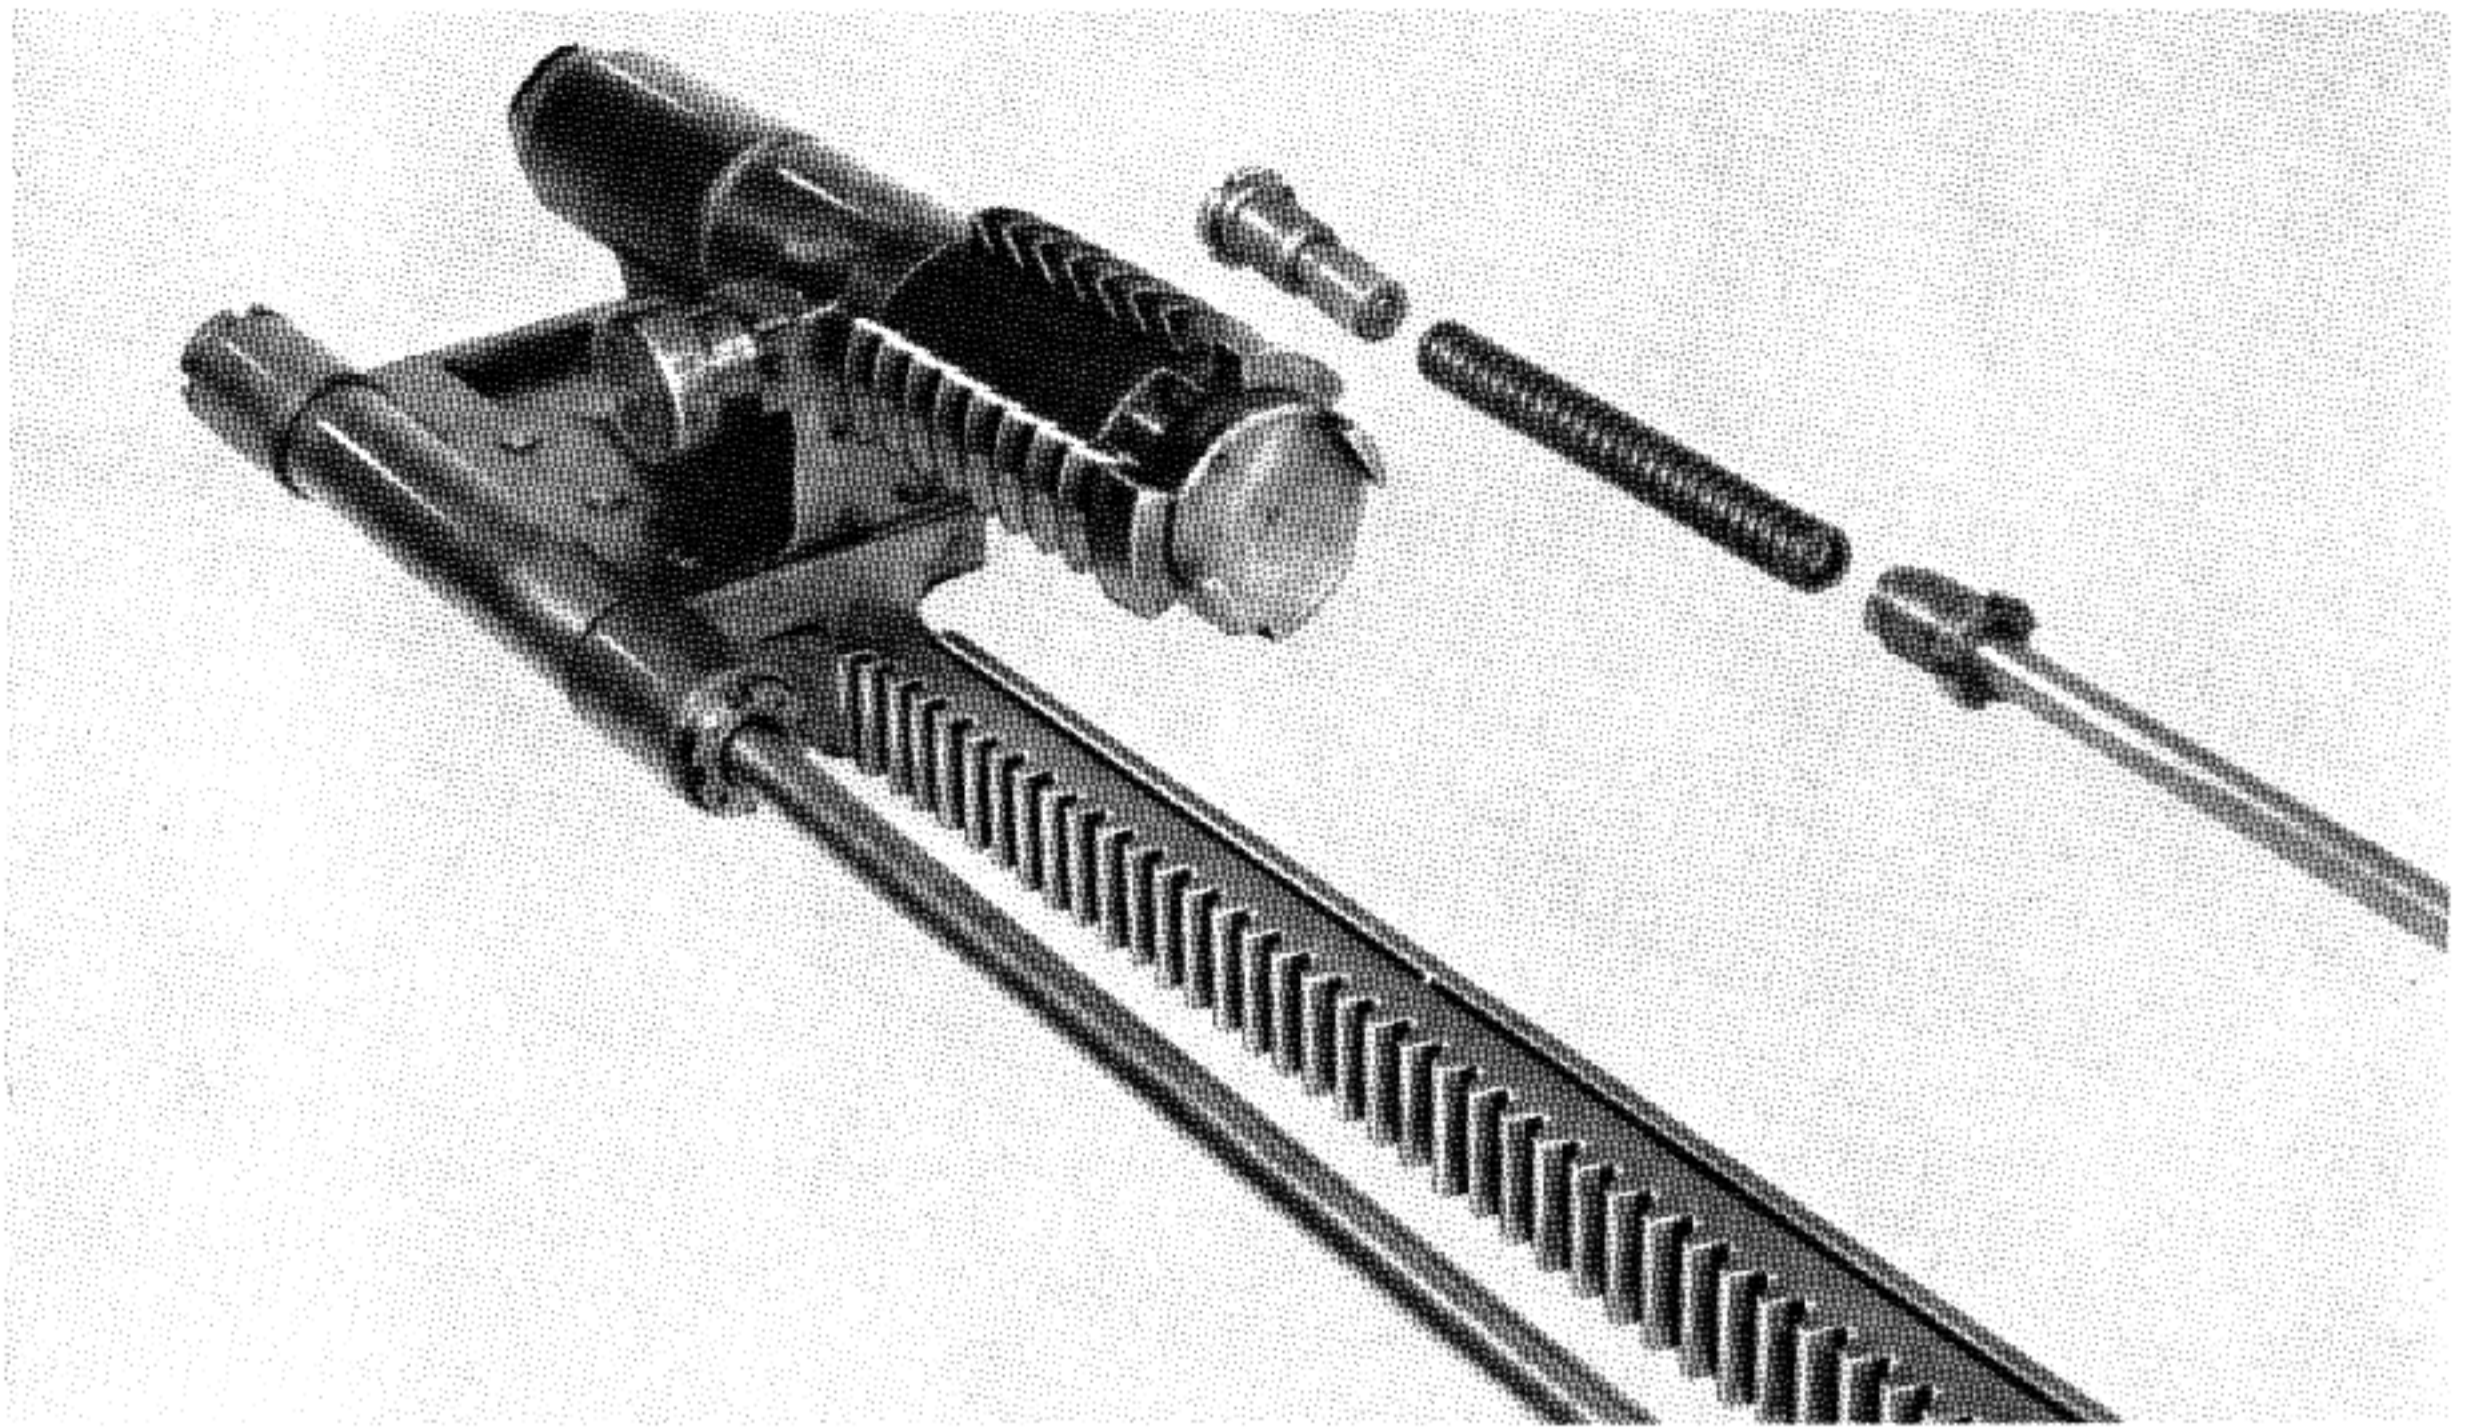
Experimental Italian 47-mm Aircraft Machine Gun, showing breechblock carrier with breechblock affixed.
